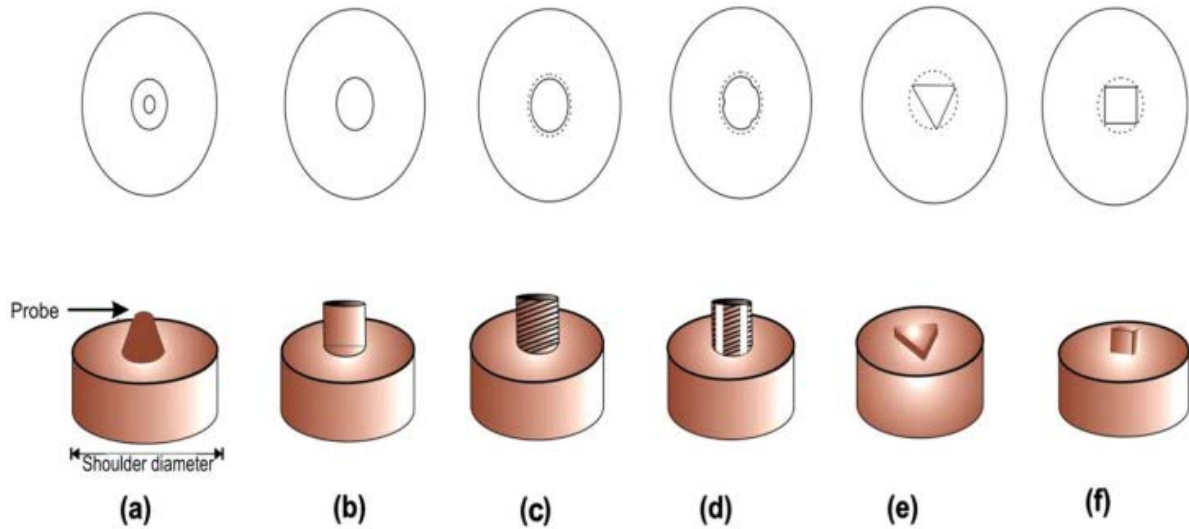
Profile of FSP tool probes a conical, b cylindrical, c threaded cylindrical, d threaded cylindrical futes, e triangular, f square [33]
